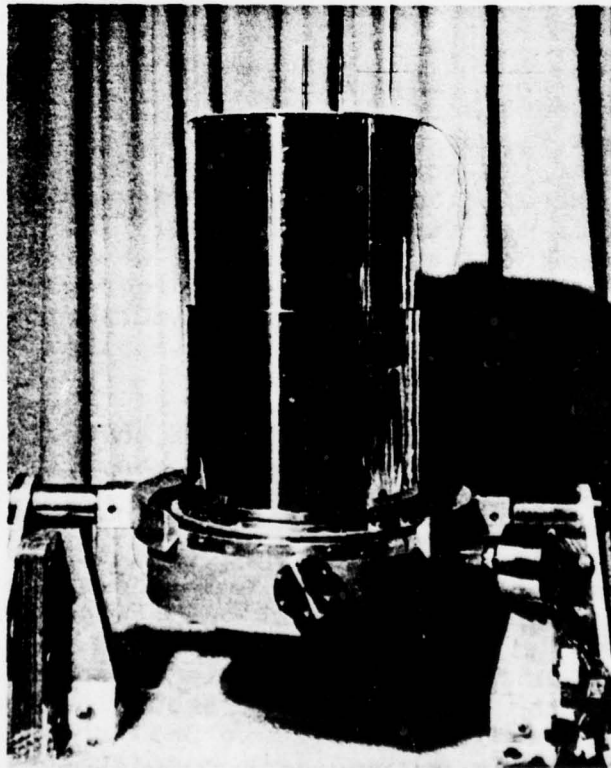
View of Assembly After Adding Inner Magnetic Shield and Inner Oven Assembly
